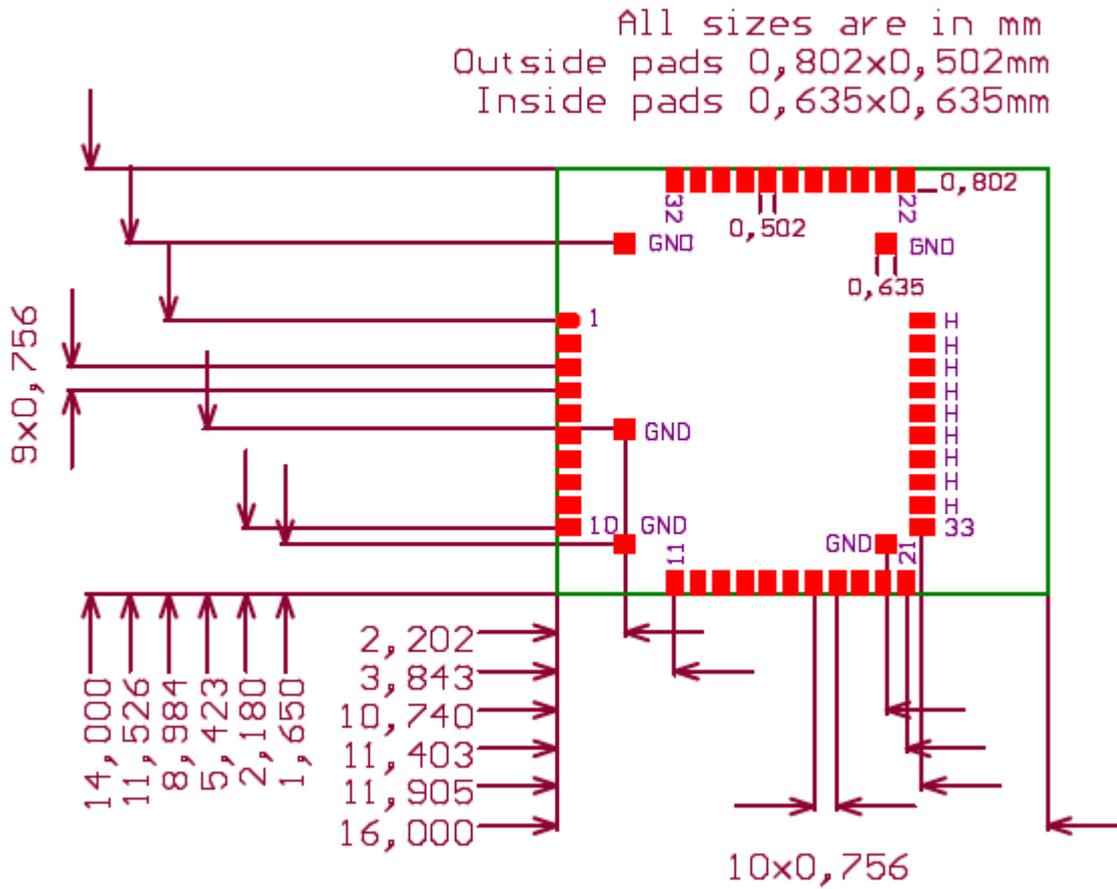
EC19W Mechanical dimensions, footprint (top view)
